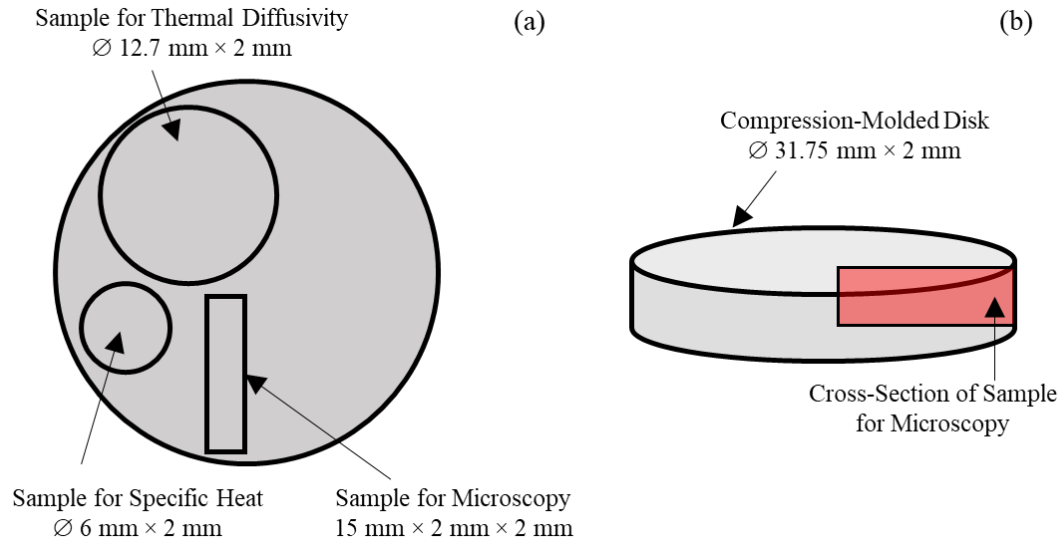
Schematic of the compression molded samples: (a) waterjet cutting schemes, and (b) cross-section of the samples for microscopy.
